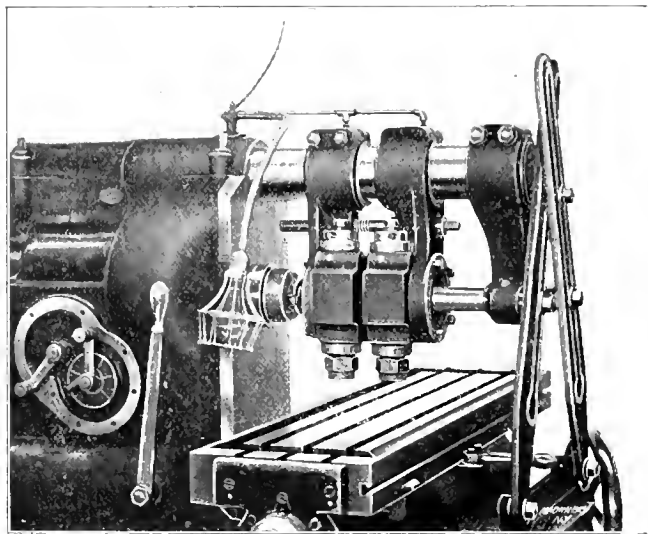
Kearney & Trecker Vertical Double Spindle Milling Attachment.
